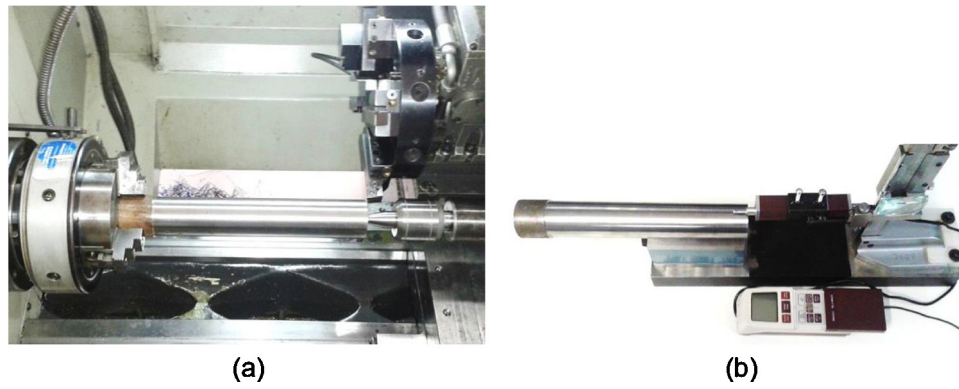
(a) Mild steel machined on a NARDINI CNC lathe with conventional roller bearings and (b) Mitutoyo portable roughness checker model SurfTest SJ-201P.
